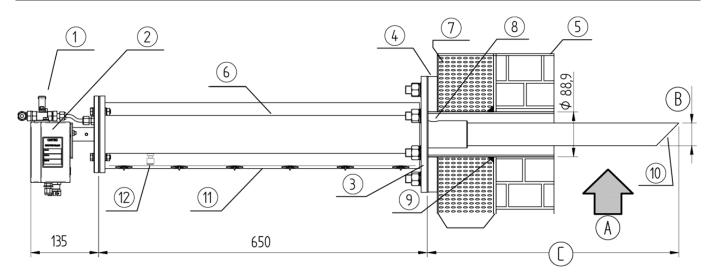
Dimensions of the ZIRKOR200, probe length 1 with cooling protection tube (dimensions in mm)
